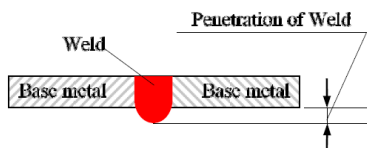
Illustration of weld penetration for a one-pass welded on butt joint configuration.
